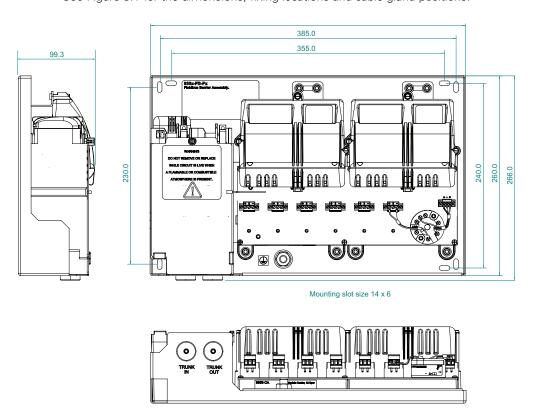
Dimensions and mounting hole positions for the assembly (9387-FB-Px-R)
